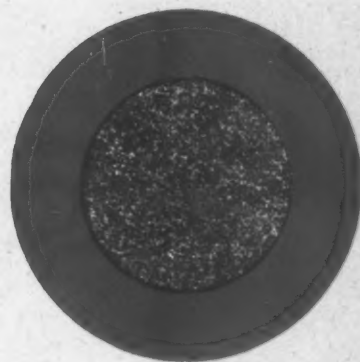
Gas-weld specimen (type No. 1 rod) highly etched to show weld location.
